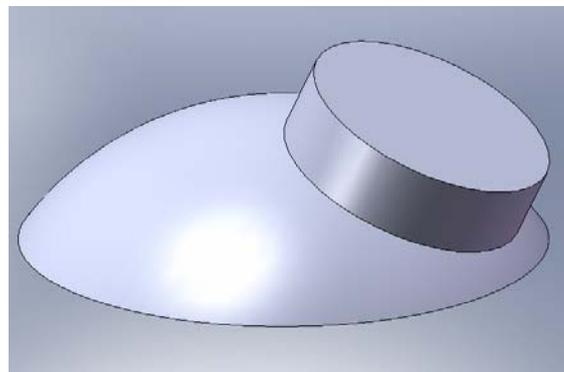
Basic design of the hemispherical combustion chamber and the valve seat
